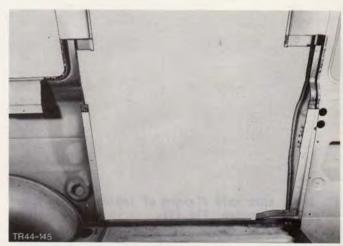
Side panel and inside window panel cut out, viewed from inside.
